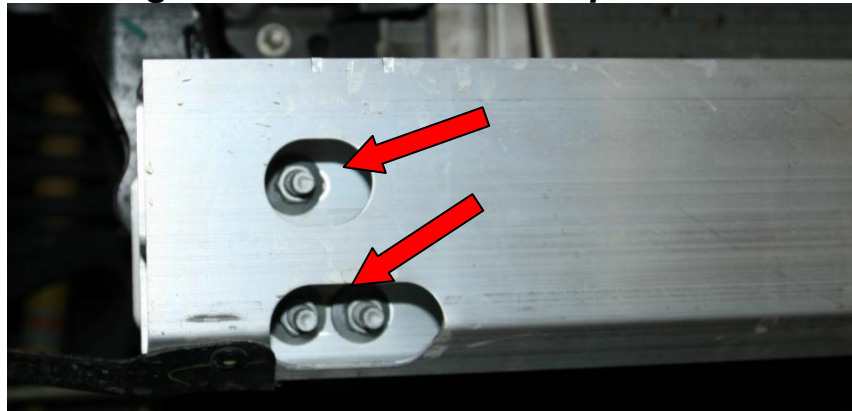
Internal bumper beam fasteners can be loosened to facilitate beam removal
